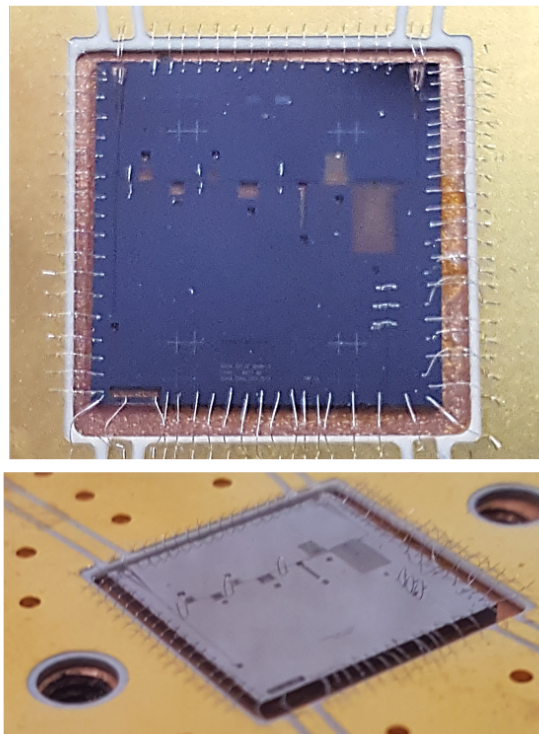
Photo of typical sample mounted to a copper plate and wire-bonded to a standard PCB design.
